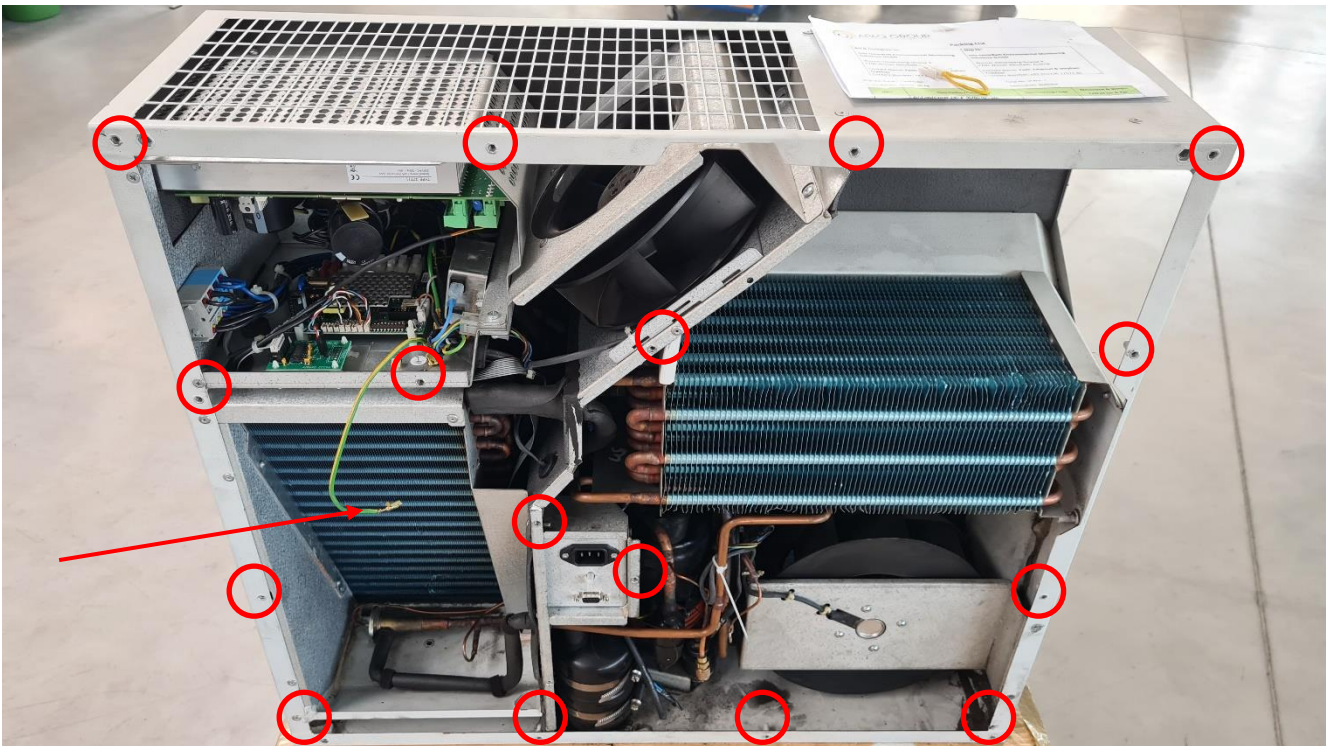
Seifert air-condition unit with removed cover. Arrow indicating the blade connector. Circles indicate the location of the removed screws.
